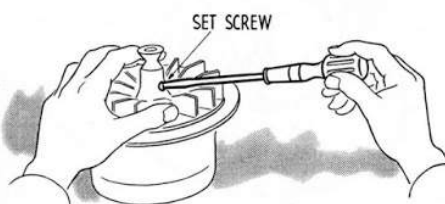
Tightening set screw on armature shaft of Models 102 and 105
